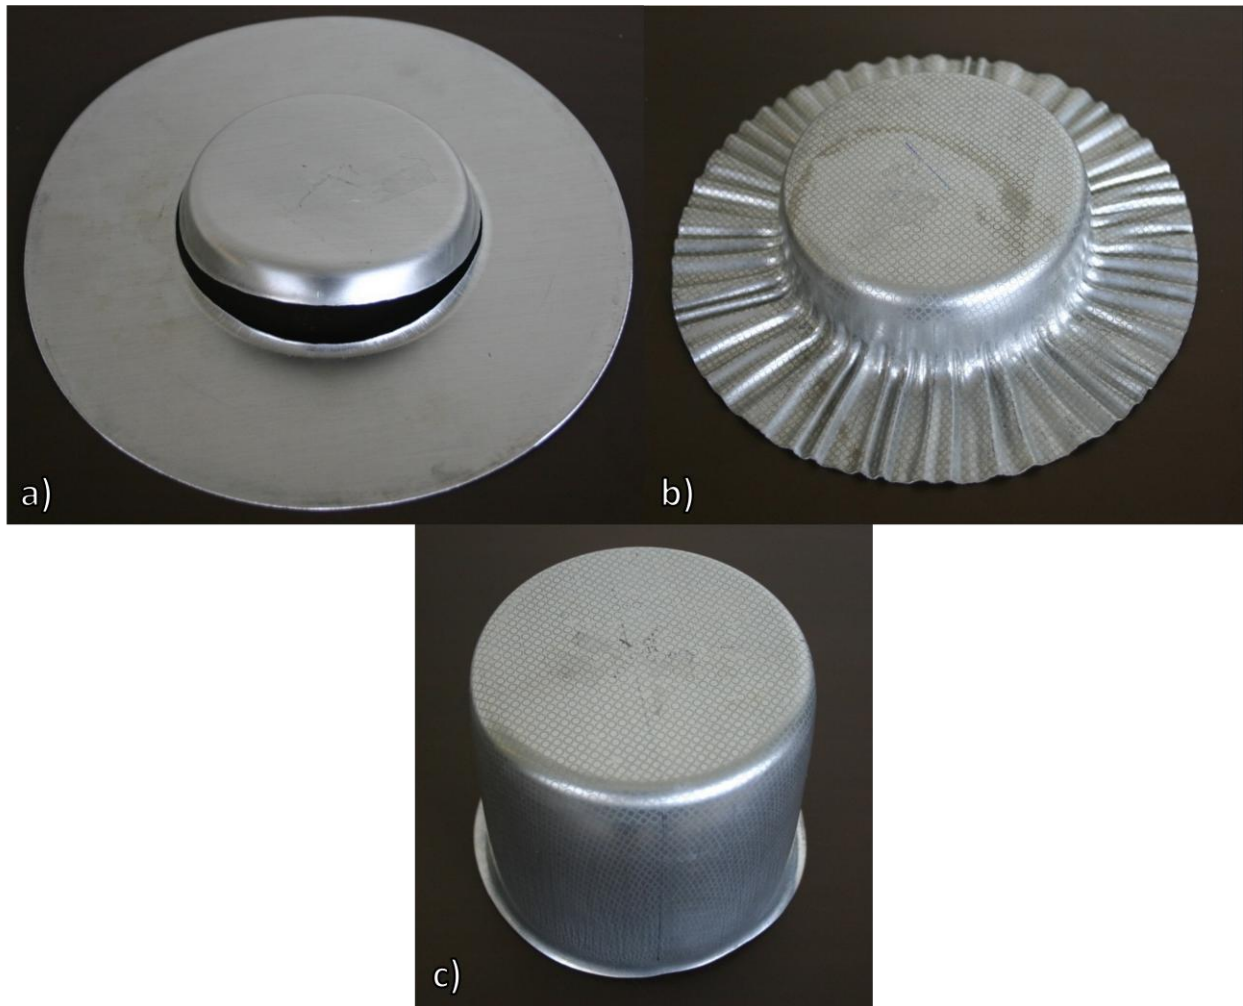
Nine inch diameter blanks drawn at 250°C showing a) failure, b) wrinkling, c) complete draw.
